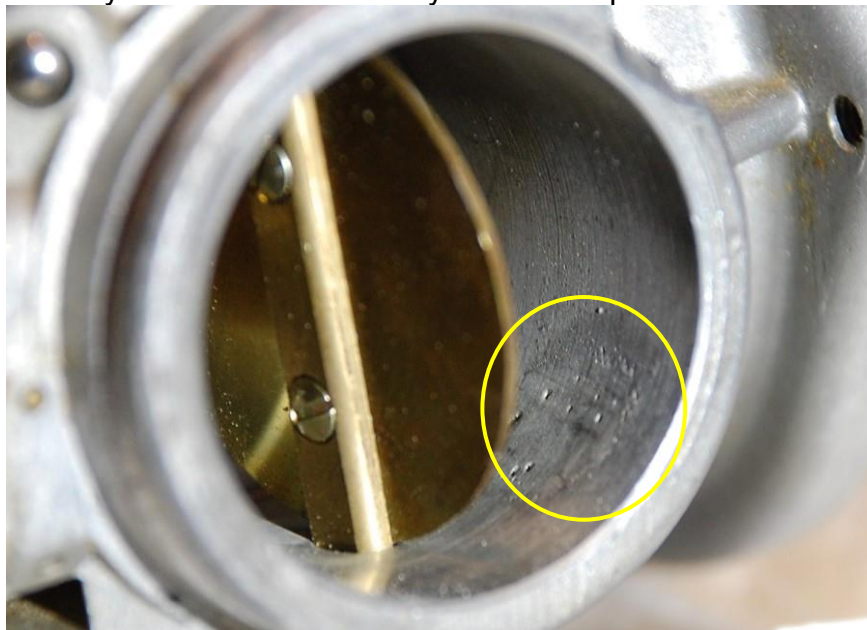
The yellow circle encloses the porous weld which is within the travel of the butterfly valve (brass disc).
